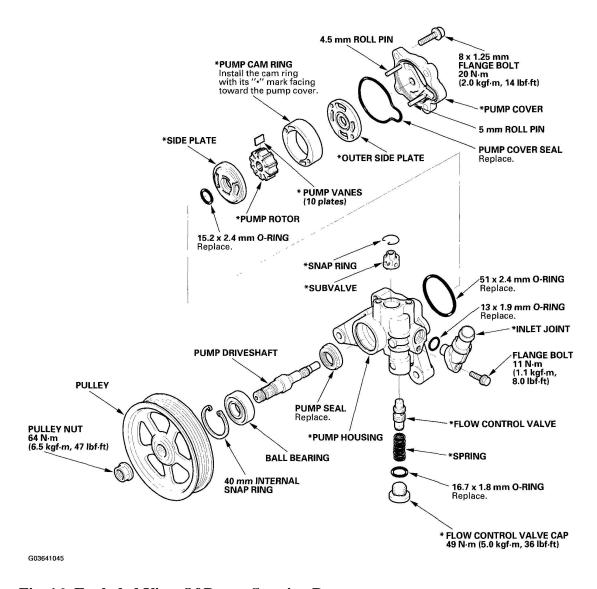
Exploded View Of Power Steering Pump Courtesy of AMERICAN HONDA MOTOR CO., INC.
